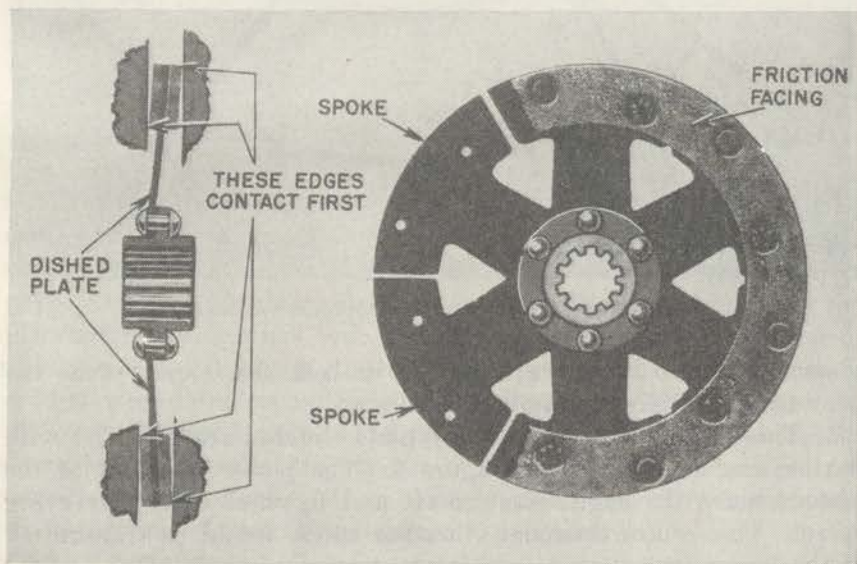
Spoked and dished driven plate showing gradual contact with driving plate.
